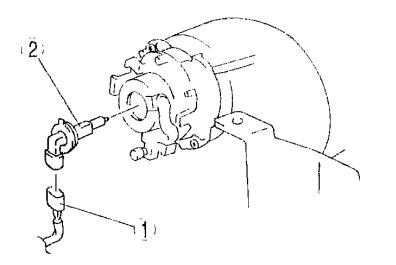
Removing Front Fog Light - With Torque Specifications Courtesy of MAZDA MOTORS CORP.
